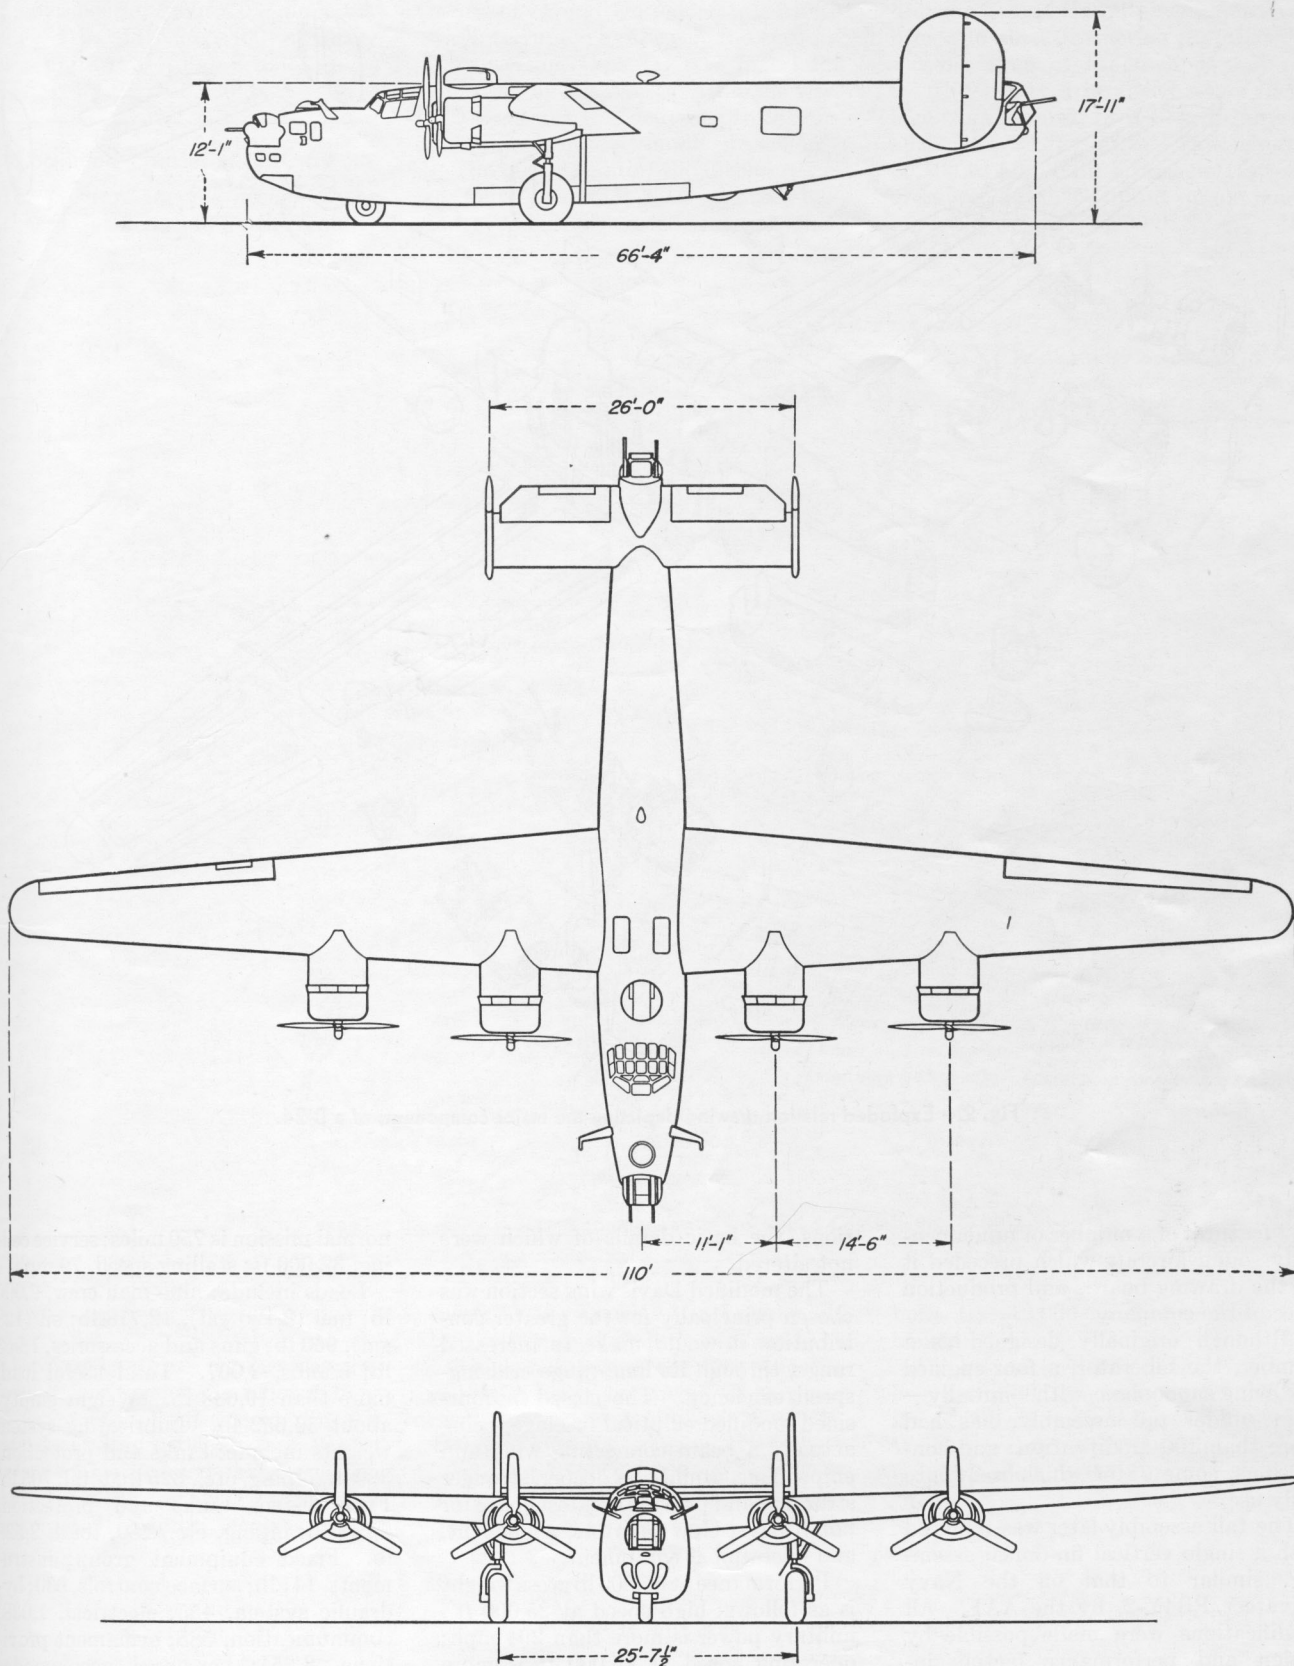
Three-view drawing of B-24 Liberator, showing major dimensions.
